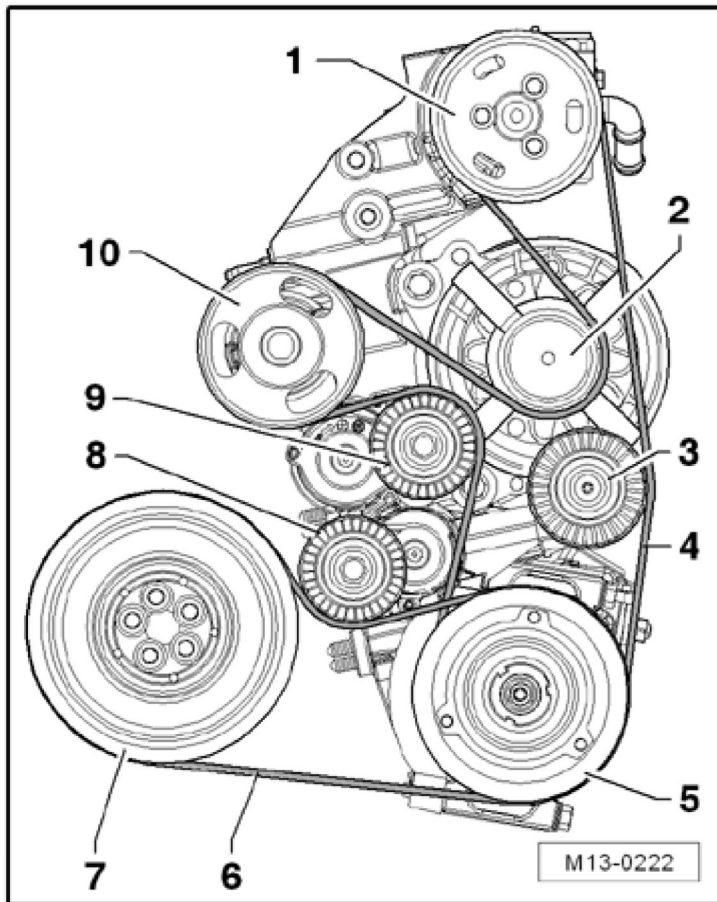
Placing Ribbed Belt For Generator, Vane Pump And Coolant Pump On To Belt Pulleys & On To Idler Pulley
